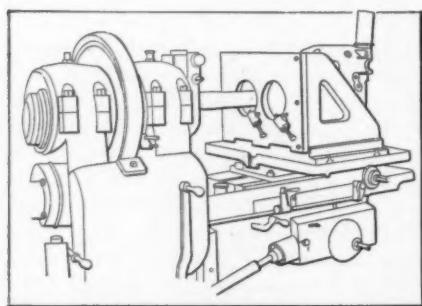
Showing a cylinder grinder operating on a two-cylinder casting
